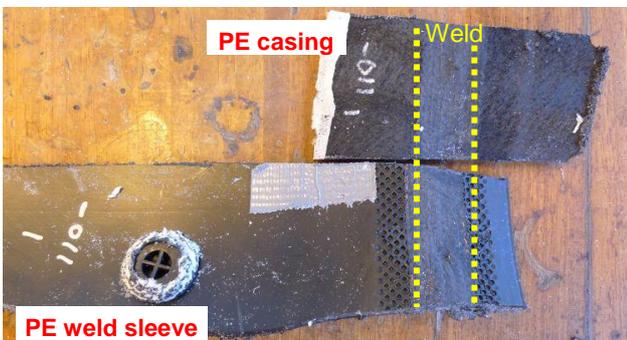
The PE weld sleeve and the PE casing are not properly fused. The PE weld sleeve could therefore easily be manually peeled away from the PE casing.
